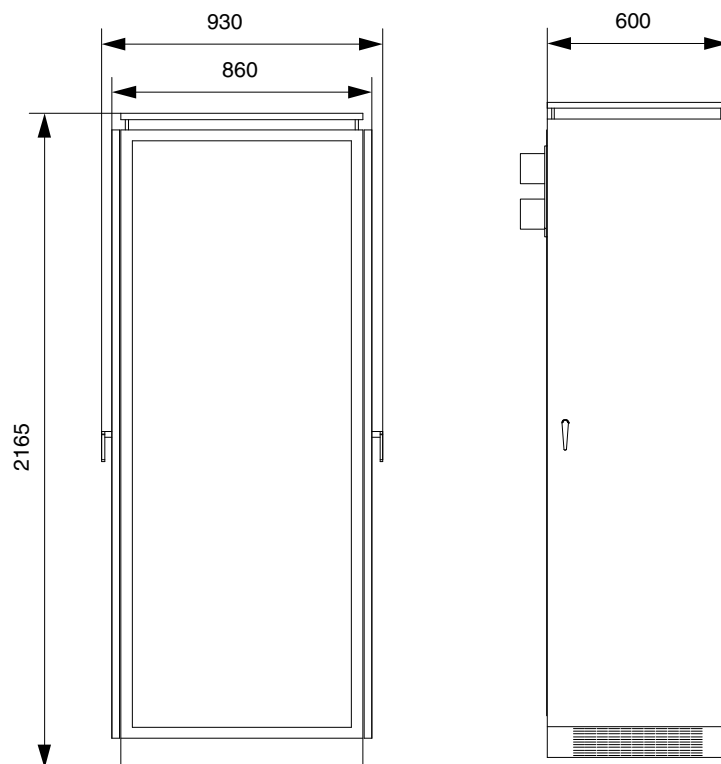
Main electronics cabinet dimensions in millimeters.
